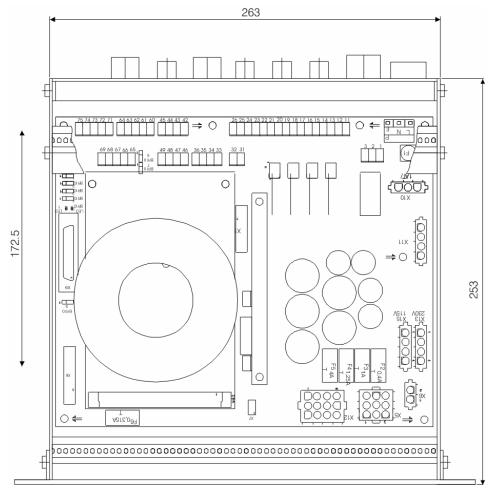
Dimensional diagram: LT2 panel installation top view
